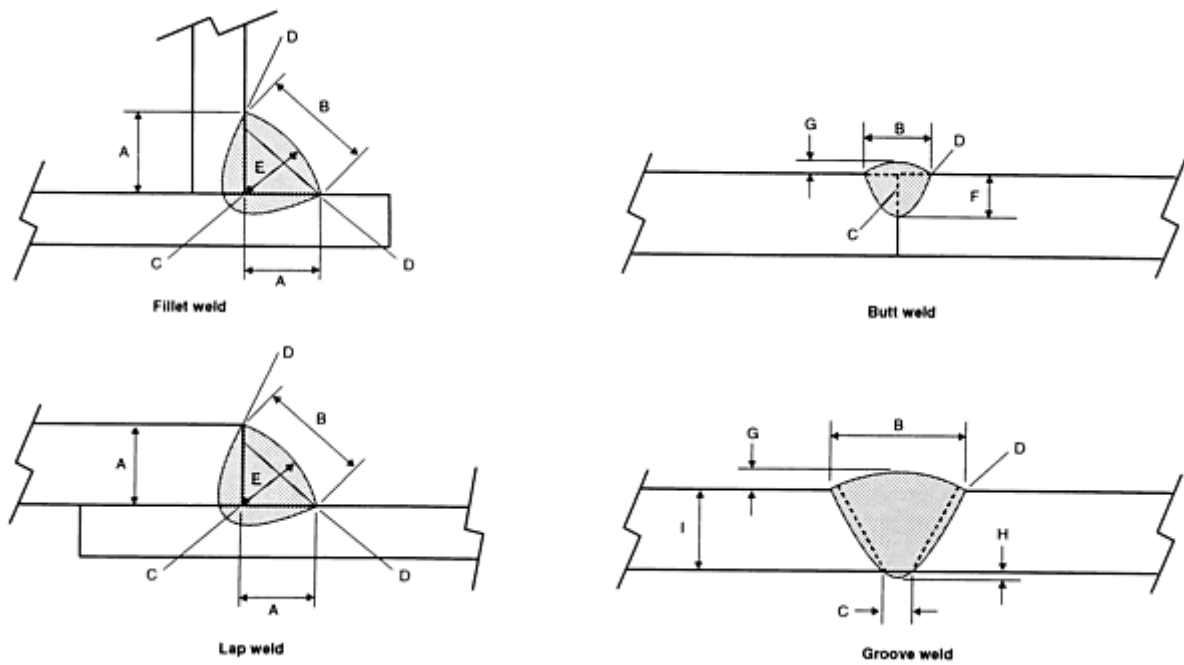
SCHEMATICS SHOWING PARAMETERS OF COMMONLY USED JOINT GEOMETRIES. A, LEG; A', SMALLER LEG SIZE (EQUAL TO SIZE OF WELD); B, FACE, C, ROOT; D, TOE; E, THROAT; F, PENETRATION (EQUAL TO SIZE OF WELD); G, FACE REINFORCEMENT; H, ROOT REINFORCEMENT; I, SIZE OF WELD
